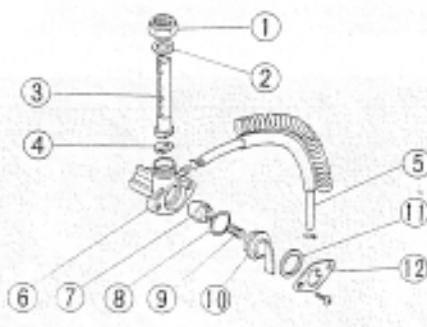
① Fuel cock lever ③ Fuel tube
